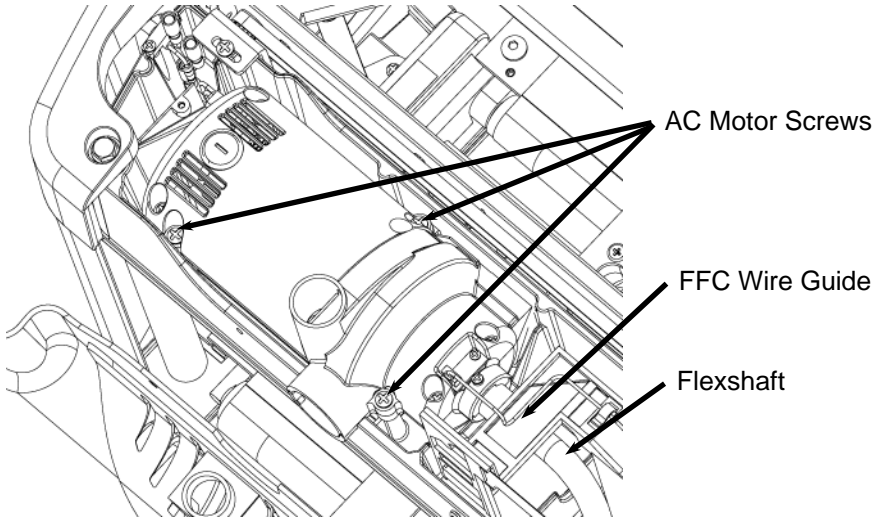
LOCATION OF AC MOTOR SCREWS
